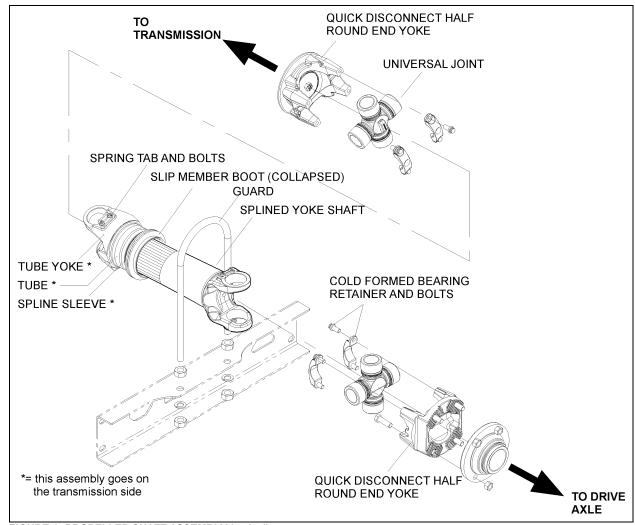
PROPELLER SHAFT ASSEMBLY (typical)
